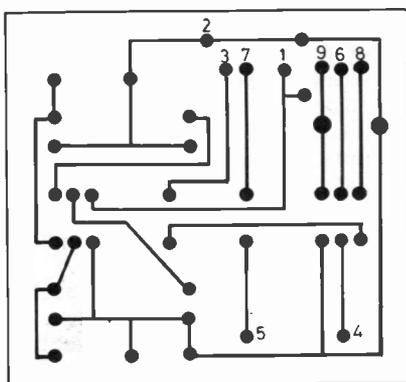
SUGGESTED PCB LAYOUT (To scale)
